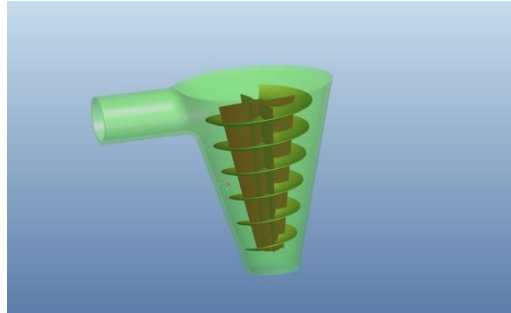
Assembly of Archimedean screw turbine 3D Mode
